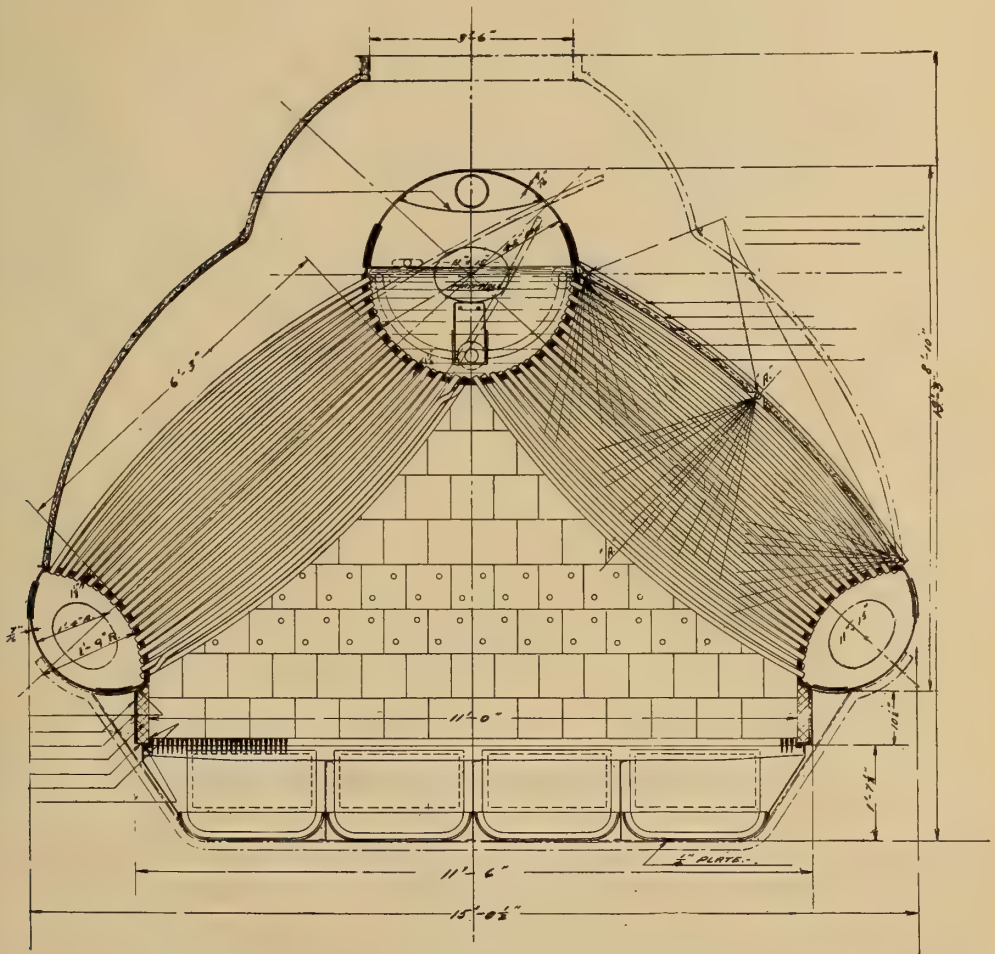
MOSHER WATER-TUBE BOILER FOR TORPEDO BOATS, DESTROYERS AND SCOUTS
